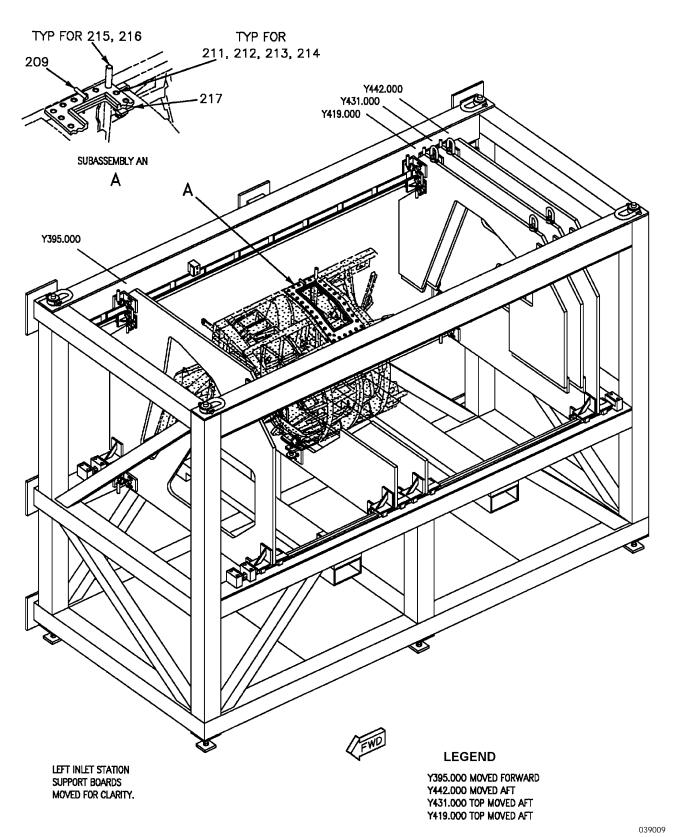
Locating and Drilling Attach Hole Pattern in Upper LEX Substructure for Access Cover 74A322609
